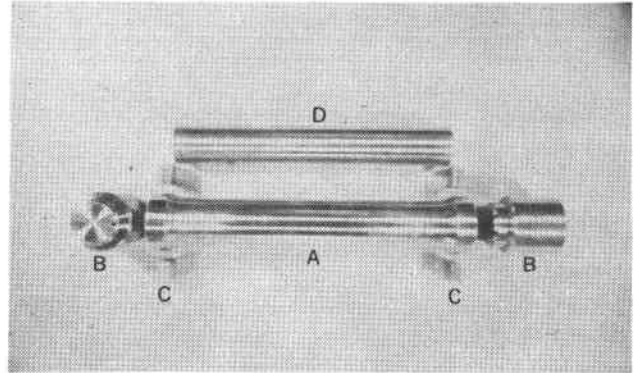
Sample Tubular Creep Rupture Specimen of Annealed Alloy 800 Prior to Welding End Caps and Final Machining (1.25 mm wall x 39 mm dia.).
